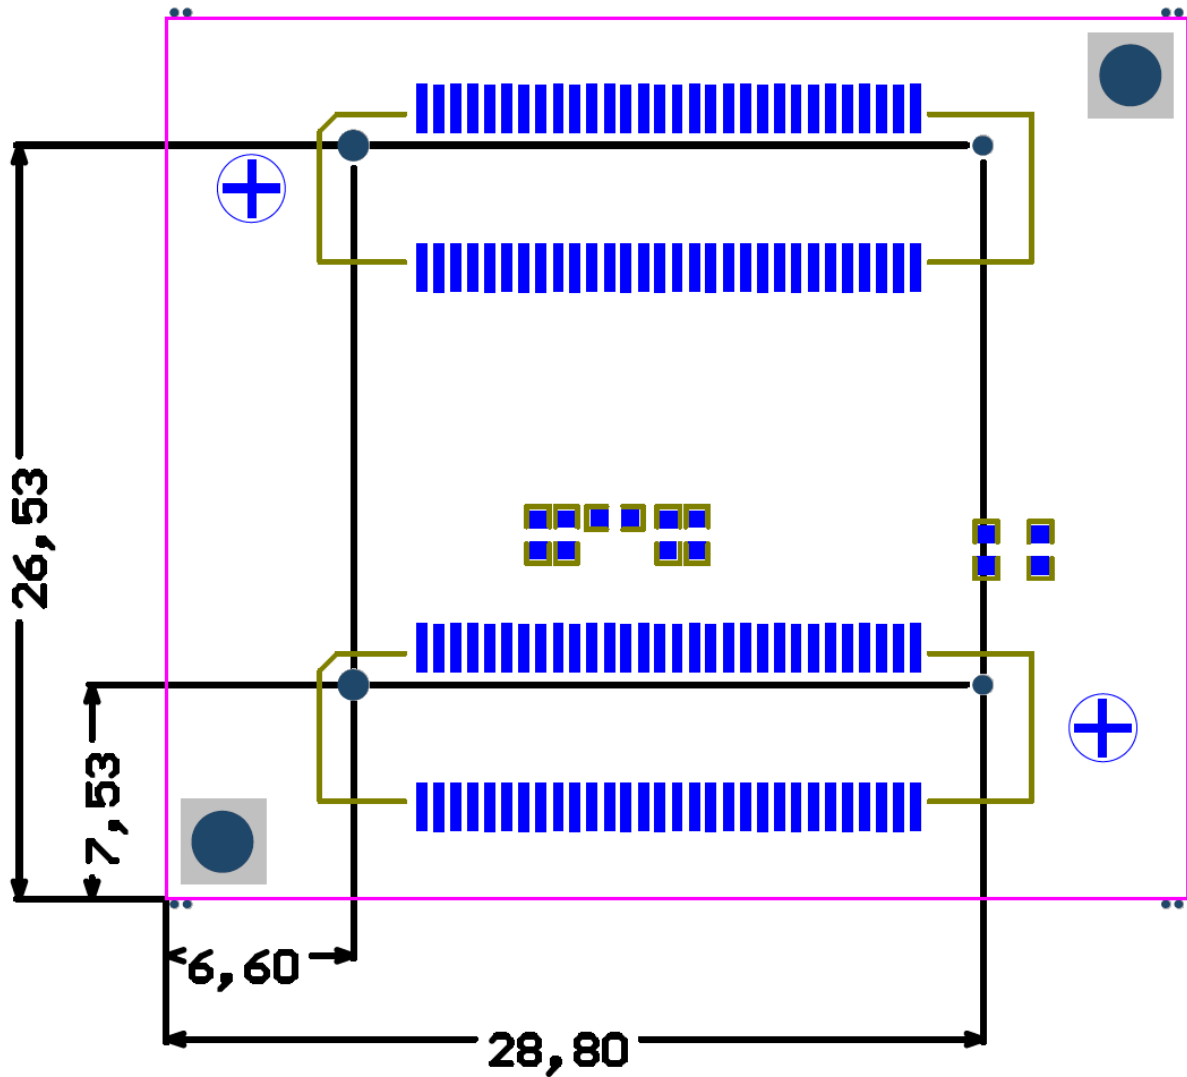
Mechanical outline and Bottom Connectors (Top View)
